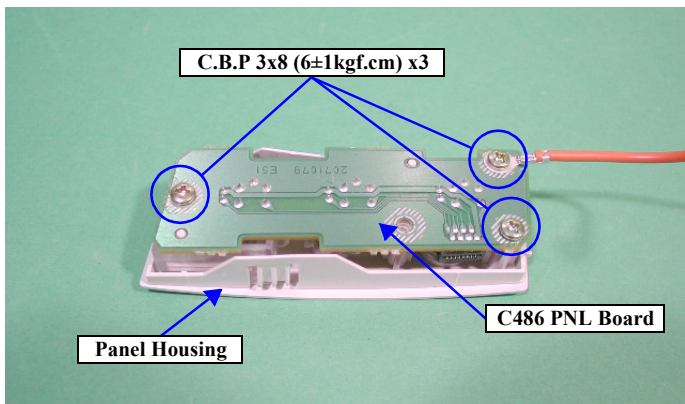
Panel Housing/C486 PNL Board Removal 2
